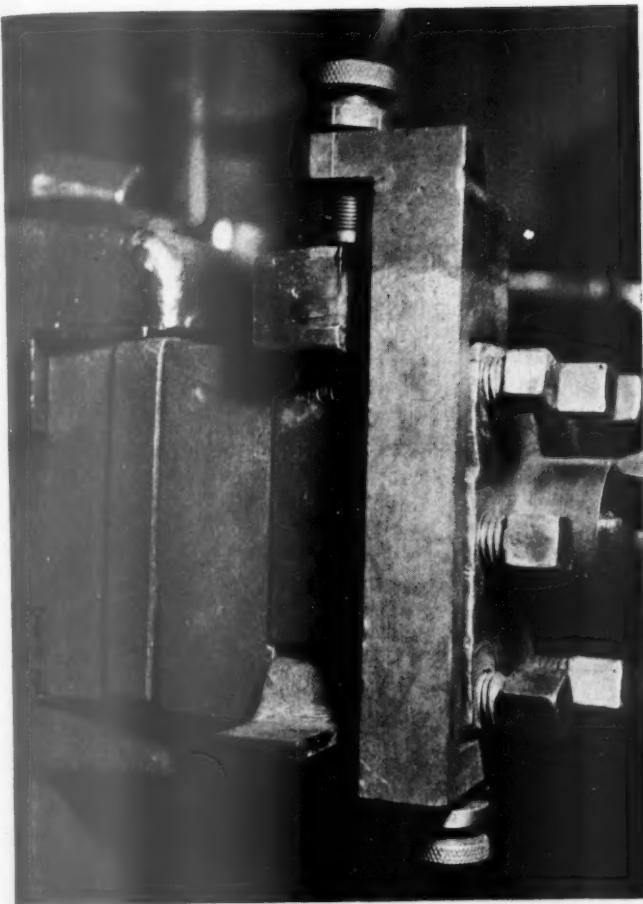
The gage used to set up the finishing tool—After the cutting edge of the tool is set against the face of the adjusting screw shown at the top and the tool is tightened in that position, all finish cuts are made with the micrometer dial on the side head rather than by calipers—Note scribe marks line-in-line on the adjusting screw and body
